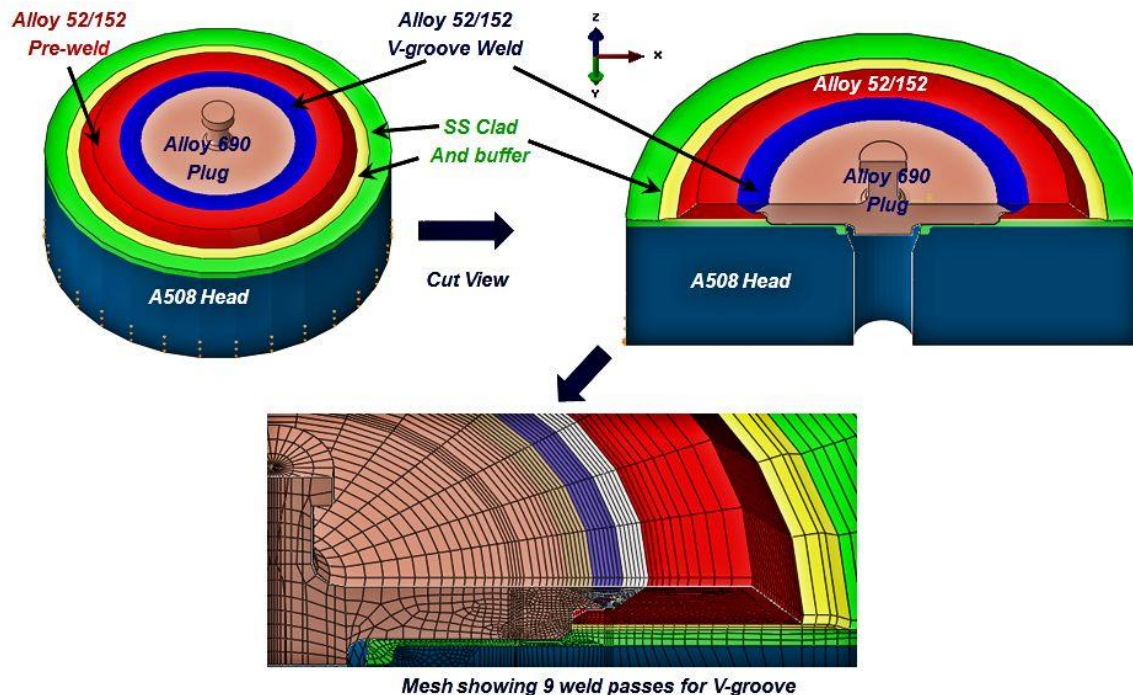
Plug weld example (sanitized proprietary example)
